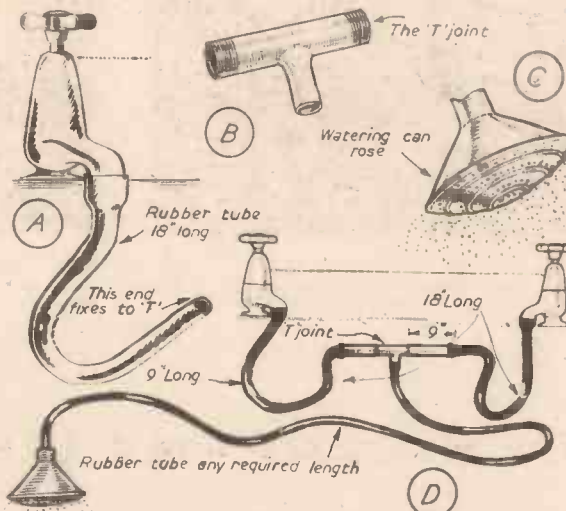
(A) Short rubber tube; (B) T-joint; (C) Watering can rose; (D) Complete attachment.
